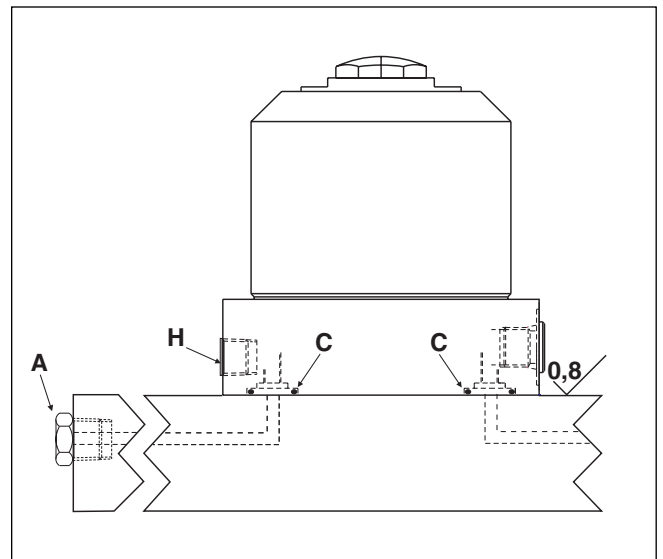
Venting through manifold port / Hydraulic manifold mounting
